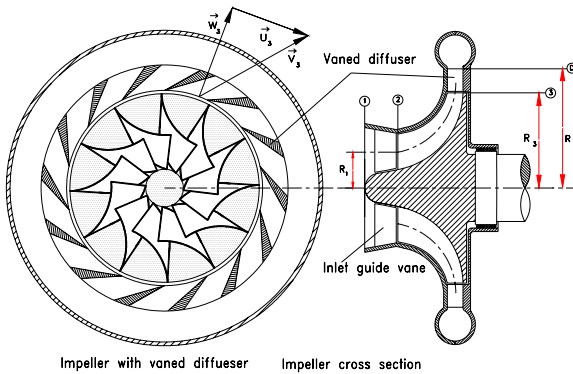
Single stage radial compressor with an inlet guide vane and exit diffuser
